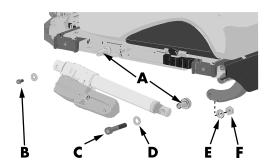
LINAK LA28 leg rest actuator is held in place by two screw joints, (B) and (C).
